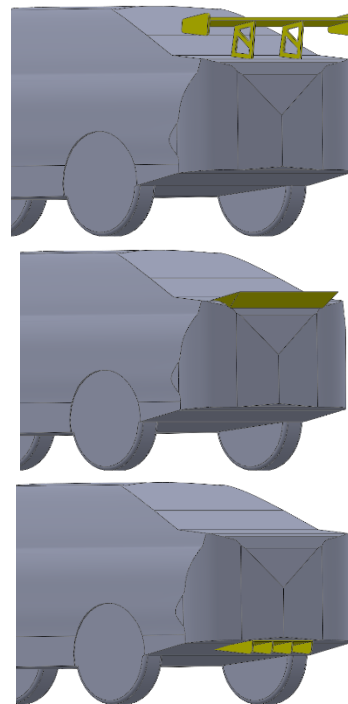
Assembly of spoiler, ducktail, and diffuser on Perodua Bezza model
